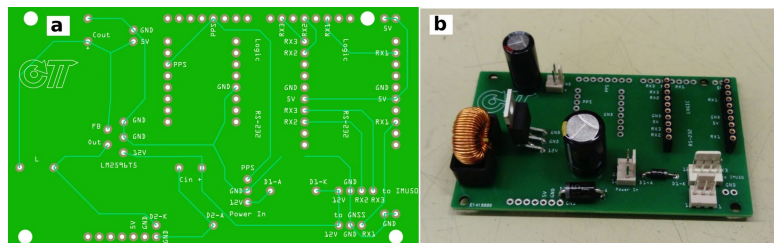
(a) Schematic view of the developed power and communication board. (b) Picture of the assembled board.
